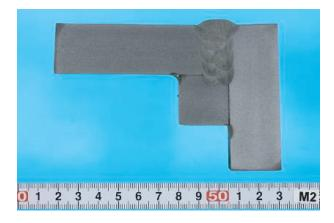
Cross section of corner weld made with ultranarrow-gap J-STAR<sup>TM</sup> welding
